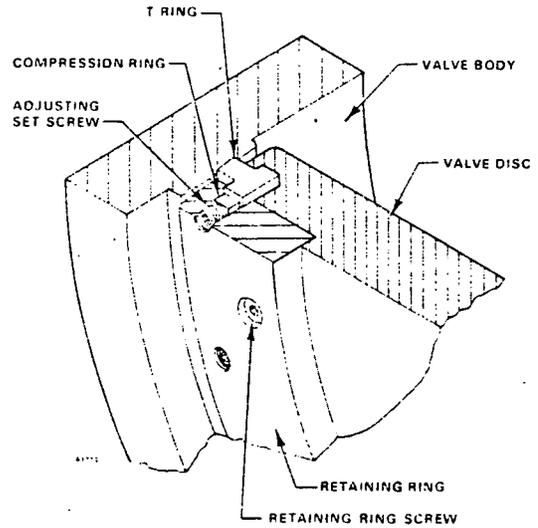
9200 Series Specification C-1 Valve T-Ring Details
